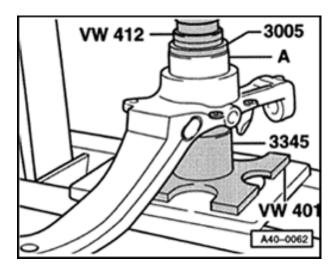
Pressing wheel bearing into wheel bearing housing with 75 mm diameter
